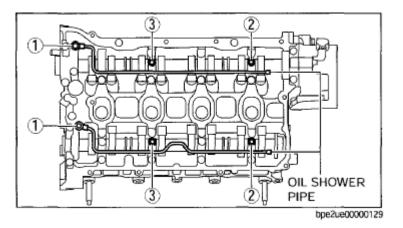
Identifying Oil Shower Pipe Mounting Bolt Tightening Sequence
